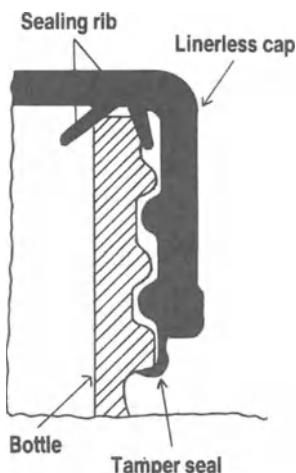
Section of a linerless cap with a tamper-proof seal.
